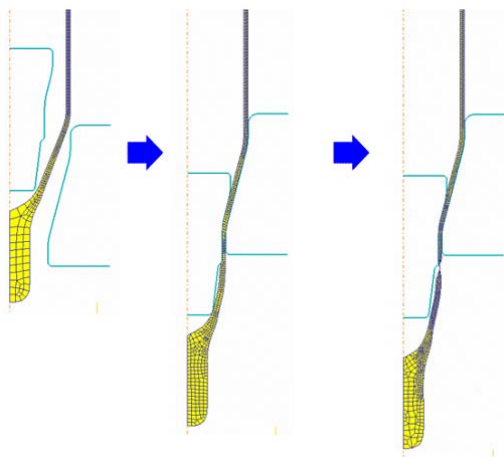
Deformed geometry of one-blow drawing process with ductile fracture
